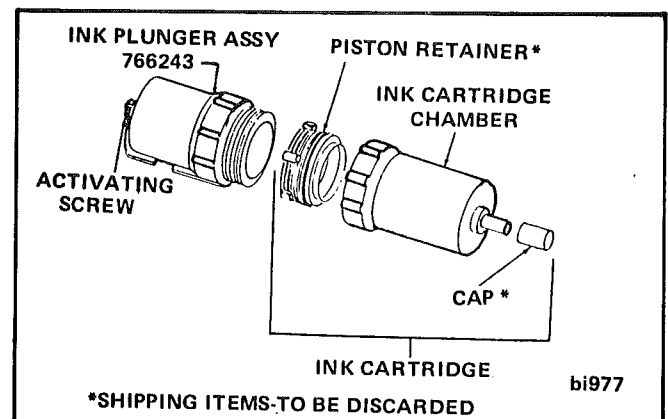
INK CARTRIDGE ASSEMBLY
